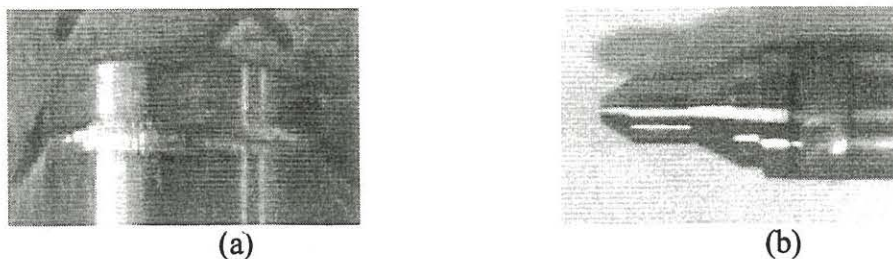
(a) ZIRCALOY-4 ELEMENT END CLOSURE WELDED BY Nd:YAG LASER,
